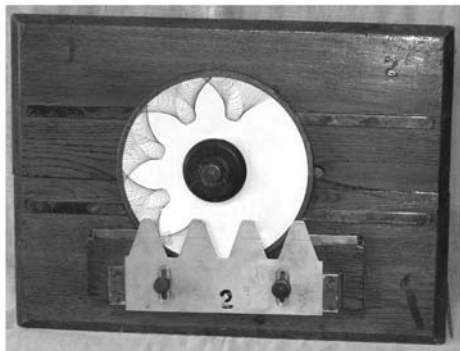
Device for profiling a tooth involute's wheels (BMHTS, 1950)
